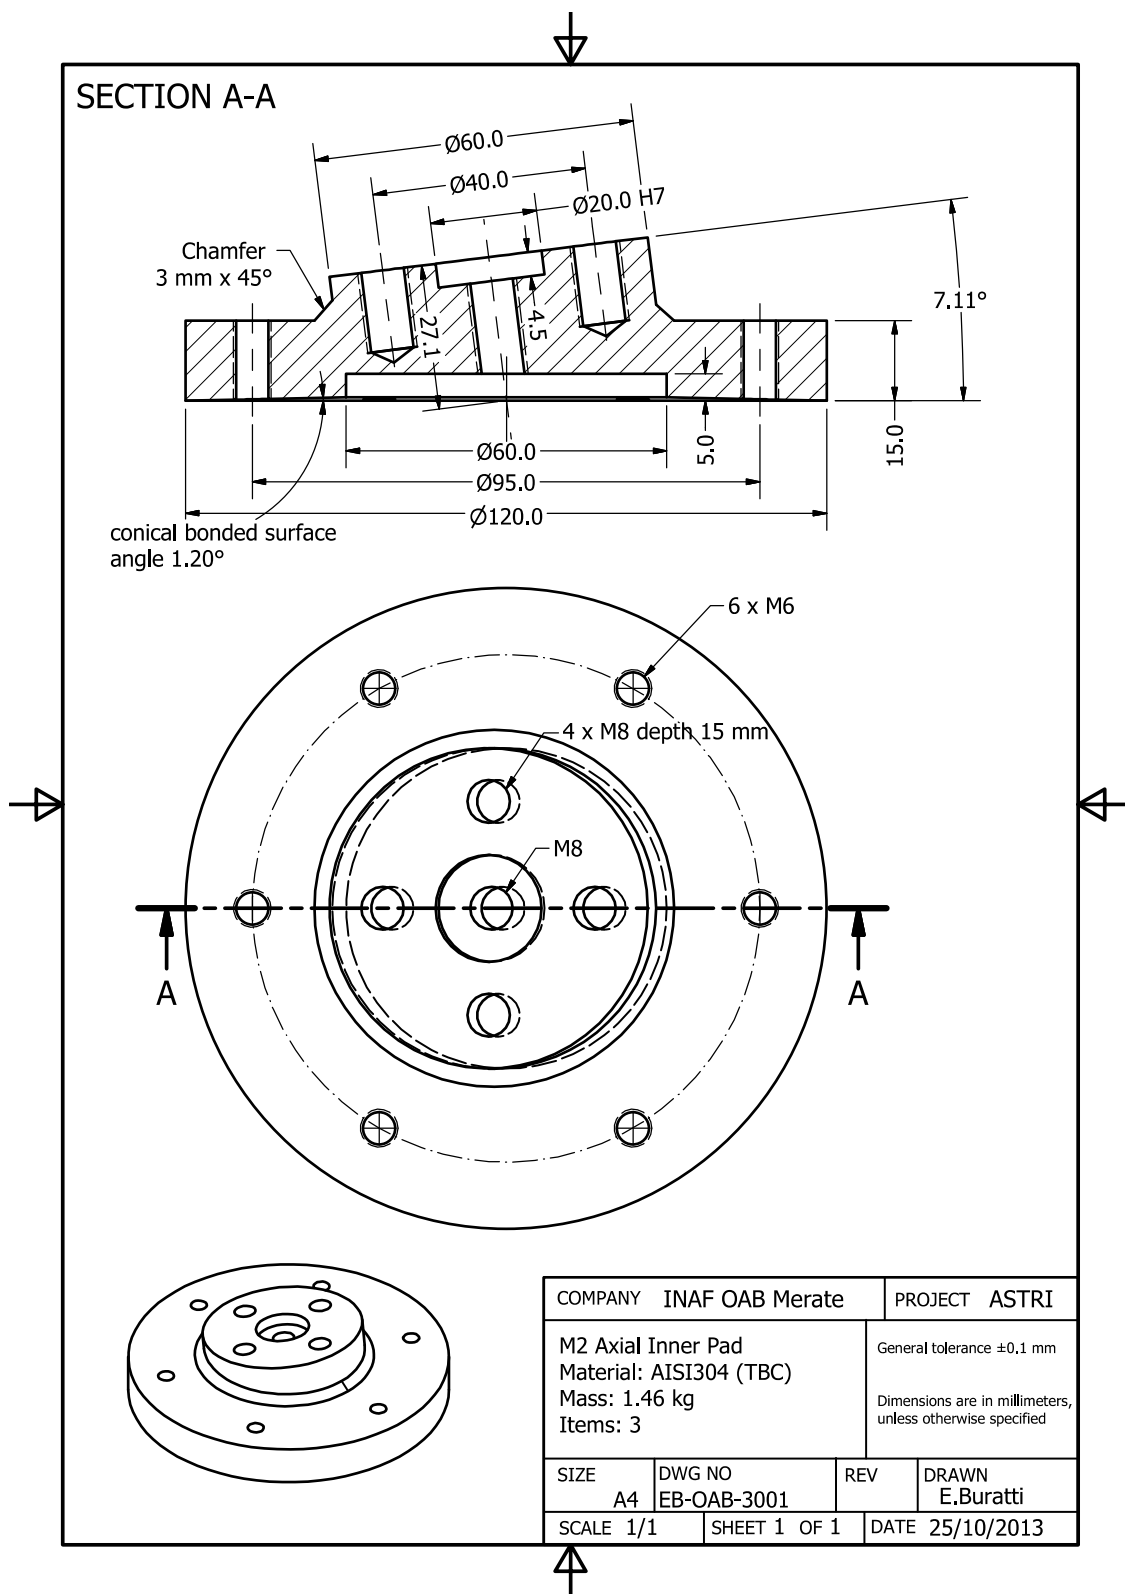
Mechanical Drawing M2 Axial Inner pad, ASTRI-INAF-DWG-7222.100-01 (formerly EB-OAB-3001).
